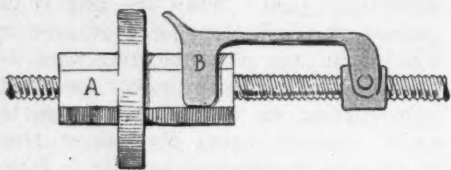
CROSSLEY BRAKE ADJUSTMENT
